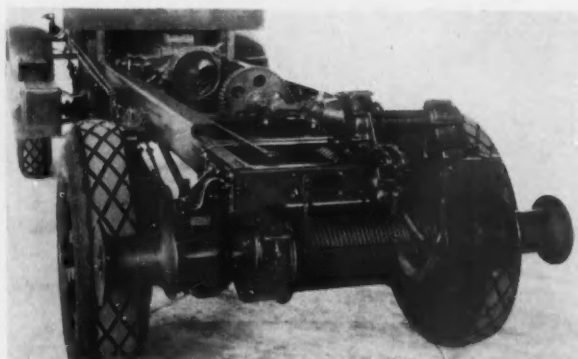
THIS HEAVY-DUTY WINCH WITH DOUBLE NIGGERHEADS IS MOUNTED BENEATH REAR OF CHASSIS FRAME INSTEAD OF AT REAR OF CAB
